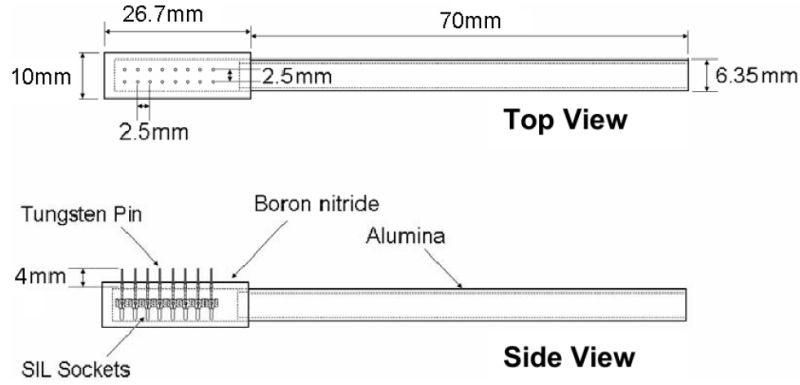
Top and side view of the rake probe used in STOR-M [177].
